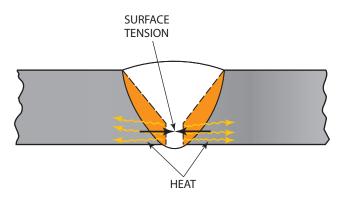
Heat is drawn out of the molten weld pool, and surface tension holds the pool in place.
